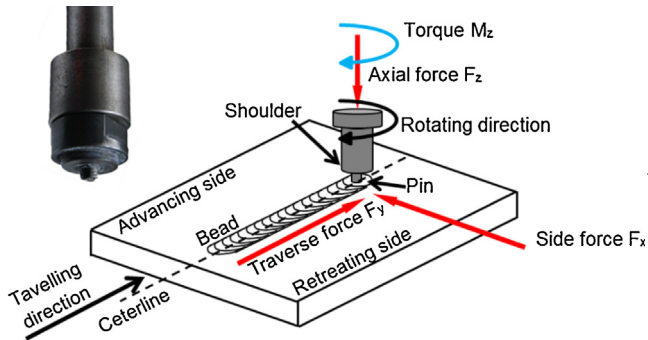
Schematic drawing of friction stir processing process and a tool.
